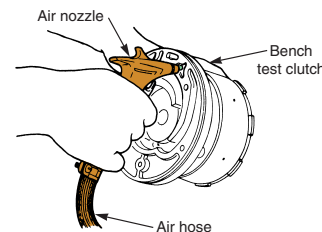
Clutch pack operation should be checked with air pressure before transmission assembly. This will ensure that the clutch pack operates properly when it is installed. The clutch plates and friction discs should lock together when air is applied to the proper passage. (Subaru)
